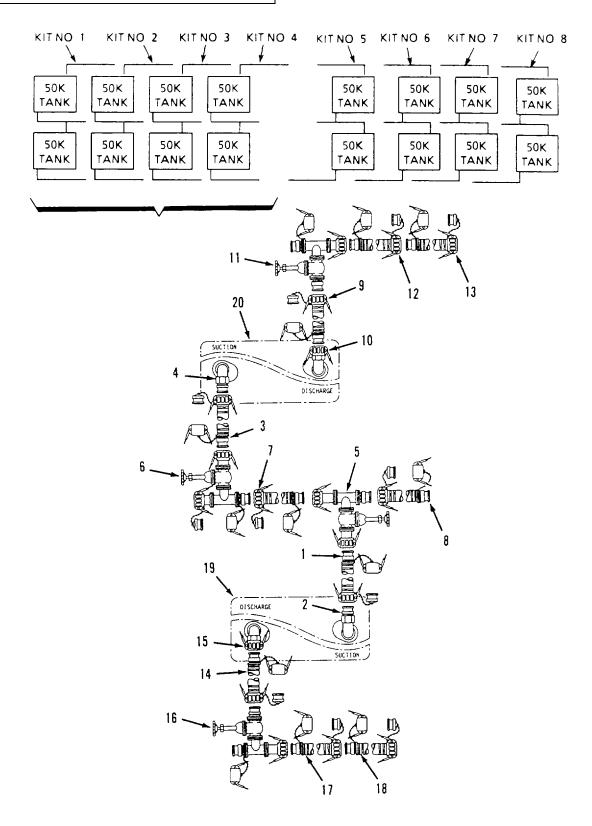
Dual lank Connection Kit Disassembly (Sheet 1 of 2).
